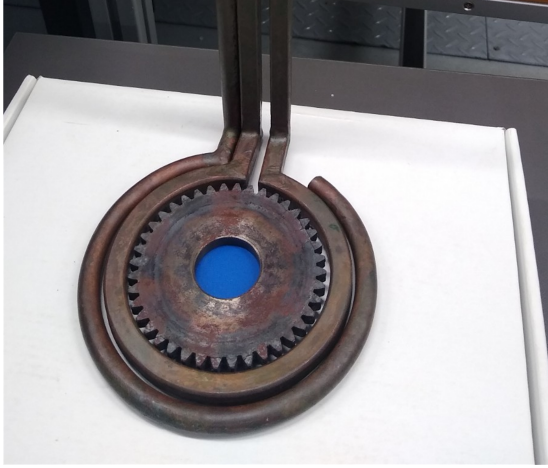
Arrangement of wheel hardening (the gap between wheel and inductor is 1 mm, external cylindrical circular pipe is the sprayer)
